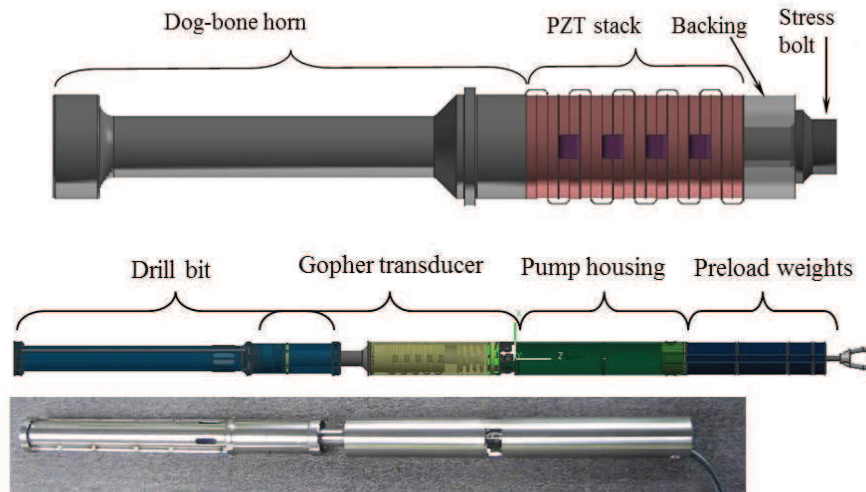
Gopher piezoelectric actuator (top) and CAD rendering and fabricated device (bottom)
